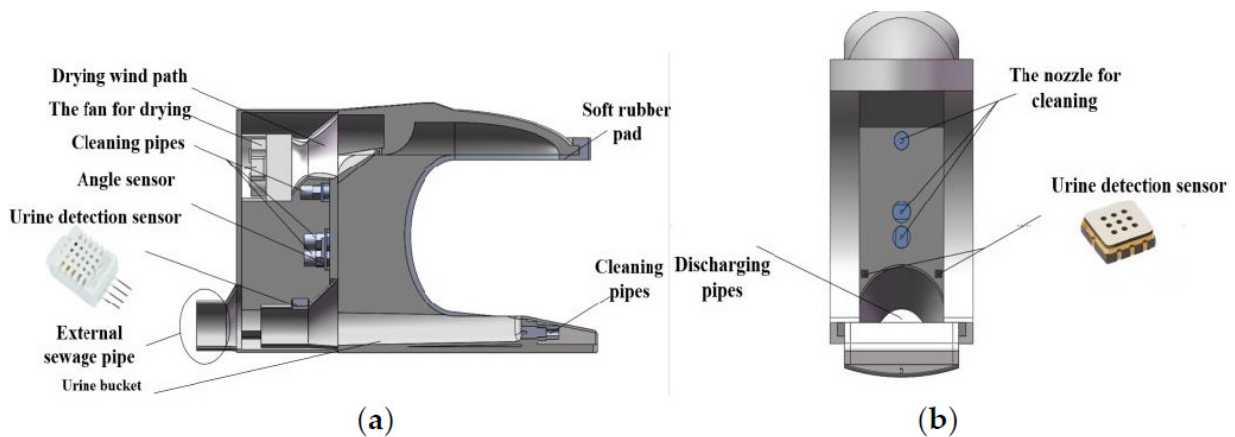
Mechanical structure of the working head. (a) Side view; (b) Front side view.
